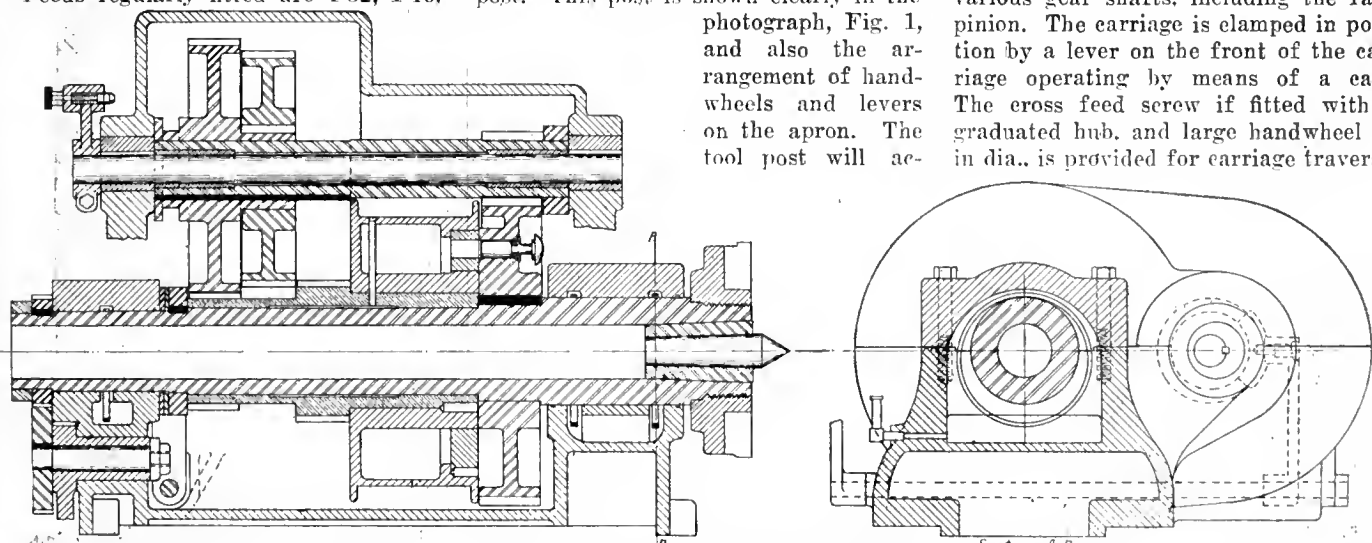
SECTIONAL ELEVATION AND END VIEW OF HEADSTOCK WITH ELEVATED PLAN OF BACK GEARS.
